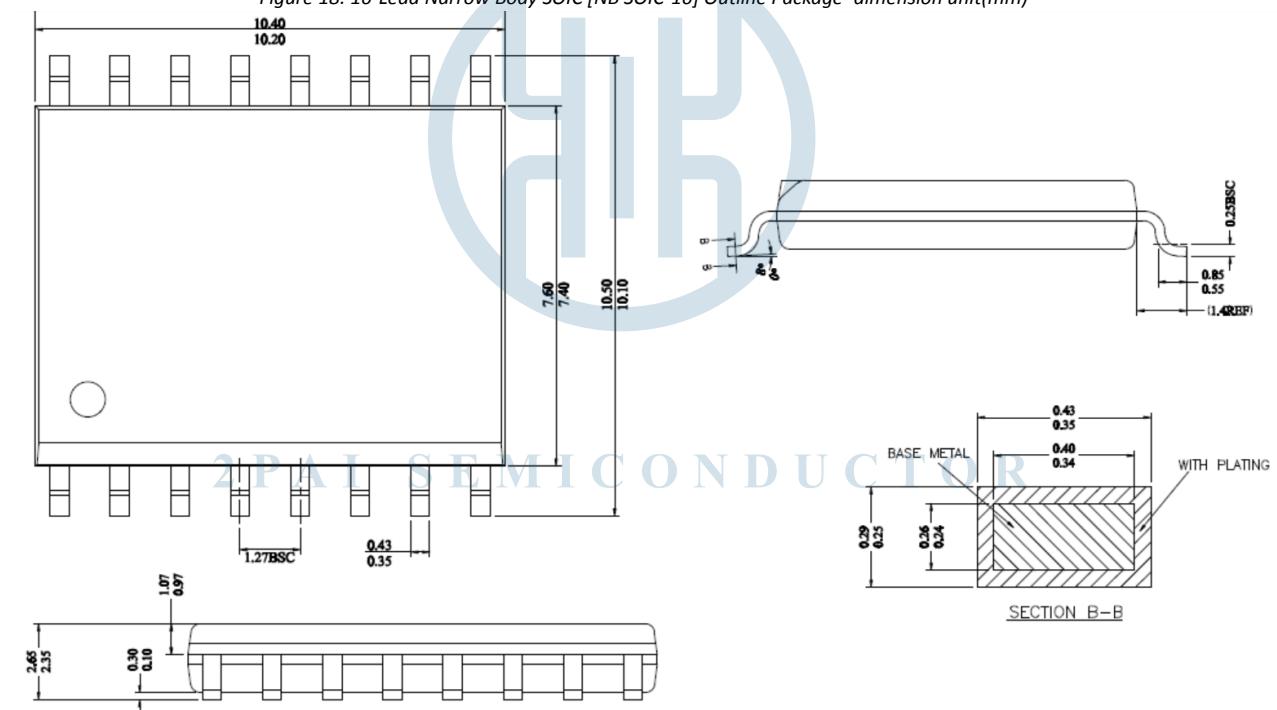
Lead Wide Body SOIC [WB SOIC-16] Outline Package-dimension unit(mm)
